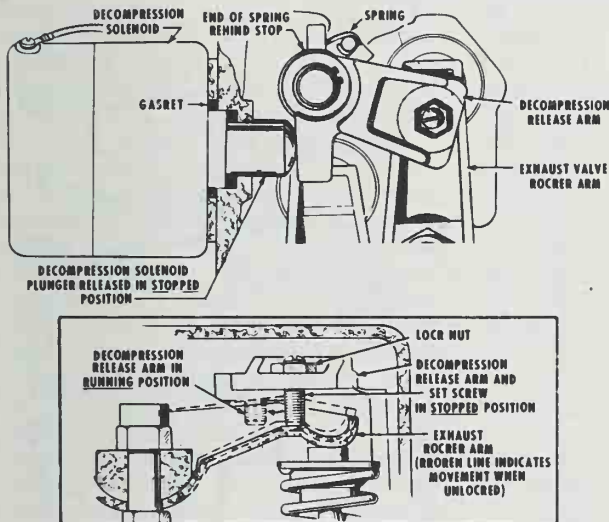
Two-position view of compression release mechanism used on model DJA engine. Upper view is downward, in line with cylinder bore. Lower view shows cross-section with decompression release holding rocker arm down and exhaust valve open as discussed in text.
